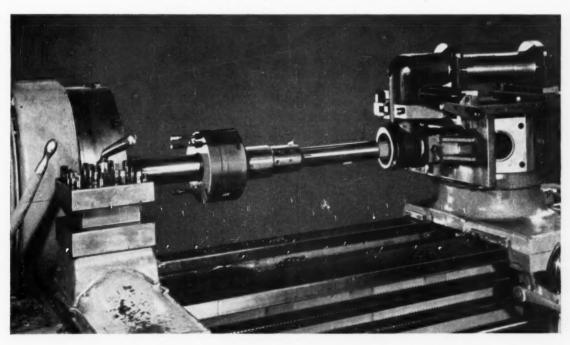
This heavy fixture holds the nose forging while a series of holes is drilled and reamed pocallel to the cylinder have.
